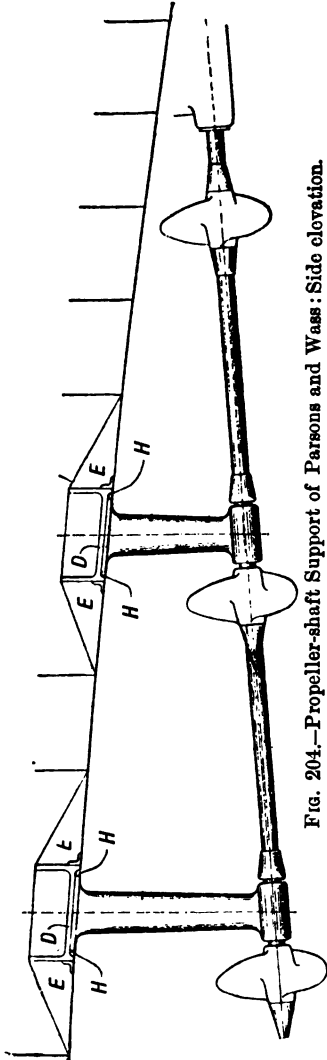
Propeller-shaft Support of Parsons and Wass: Side elevation.
